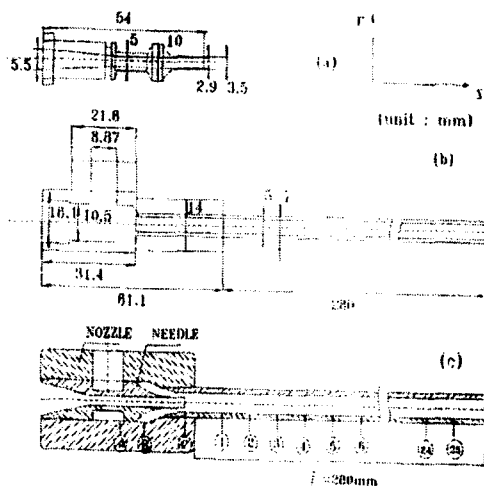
Configuration and dimensions of main nozzle (L=285mm)
